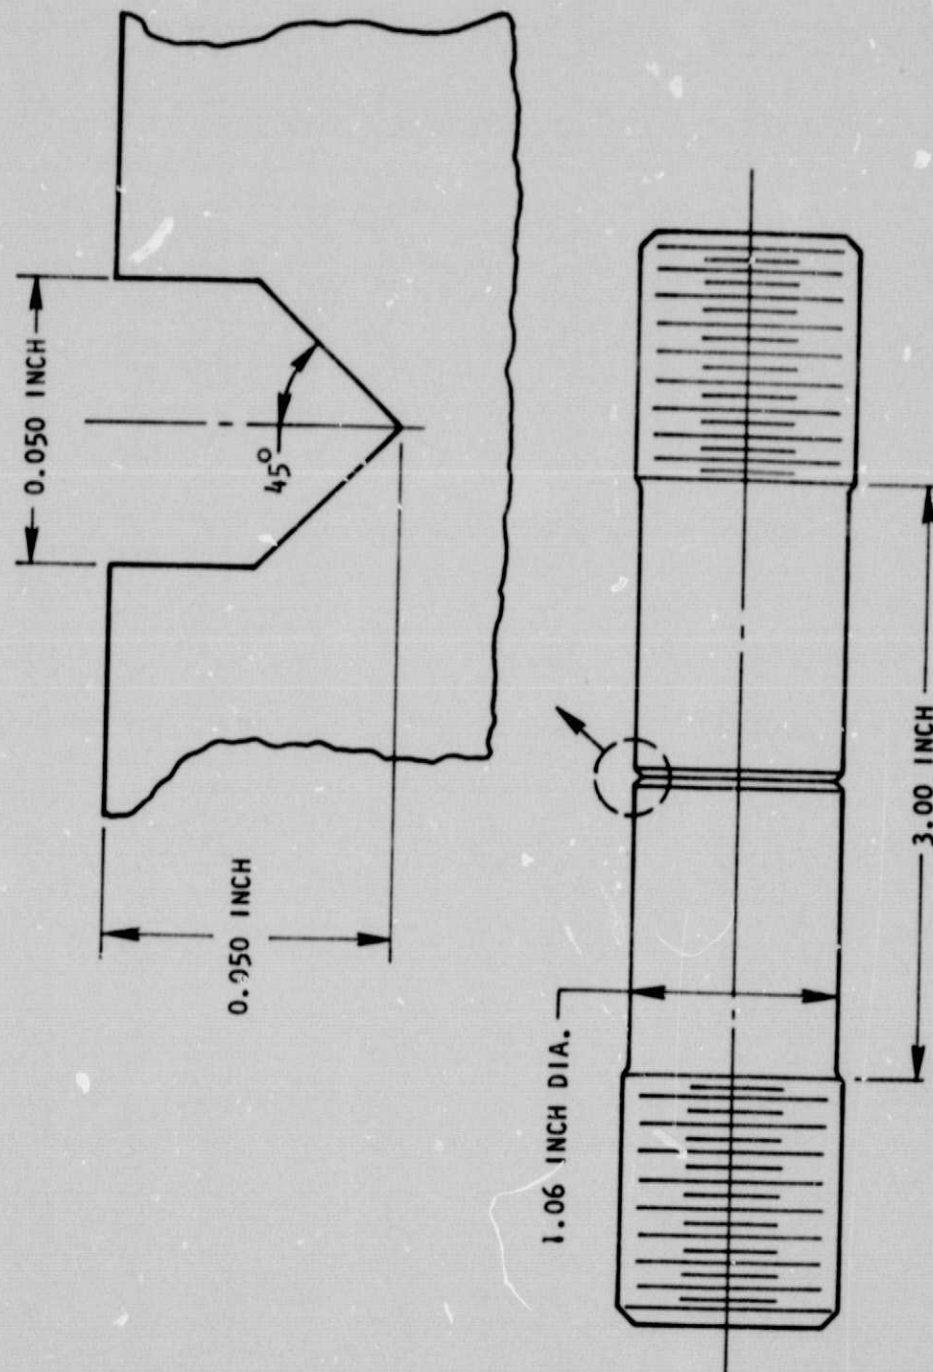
Shallow - Notched Round-Bar Specimen Test Section
